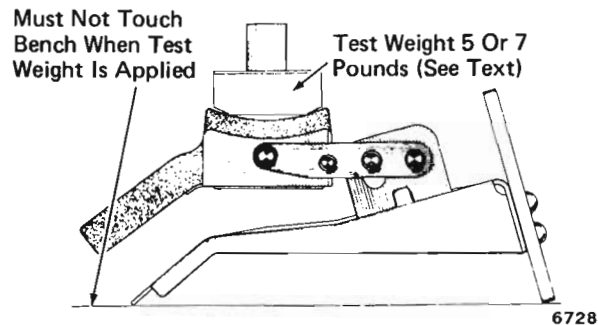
Testing Wide Window Wick Lubricator Springs
